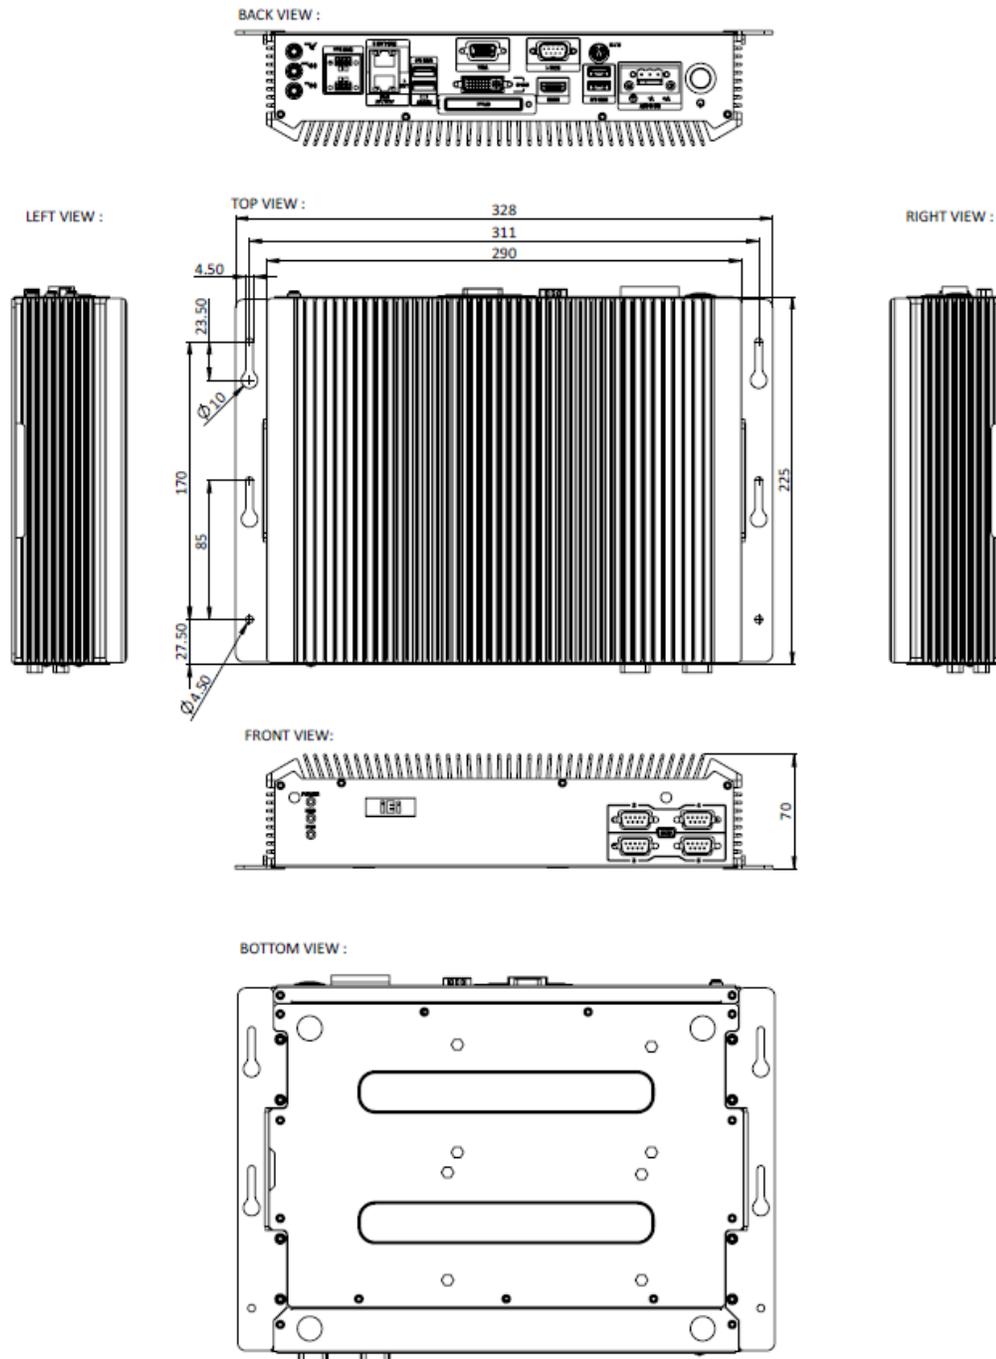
SBOX-100-QM87i Dimensions (mm)
